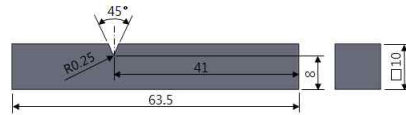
Izod (Cantilever-Beam) Impact test specimen
